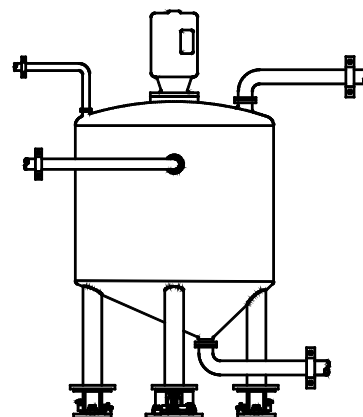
Tank Scale with Mixer and Rigid Piping
